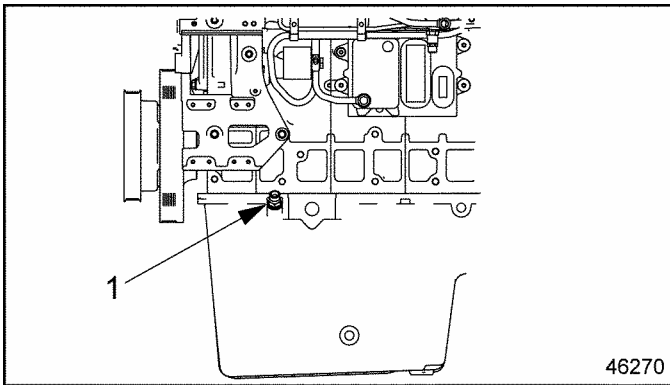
Installing Fill / Dipstick Bracket to Alternator Bracket
